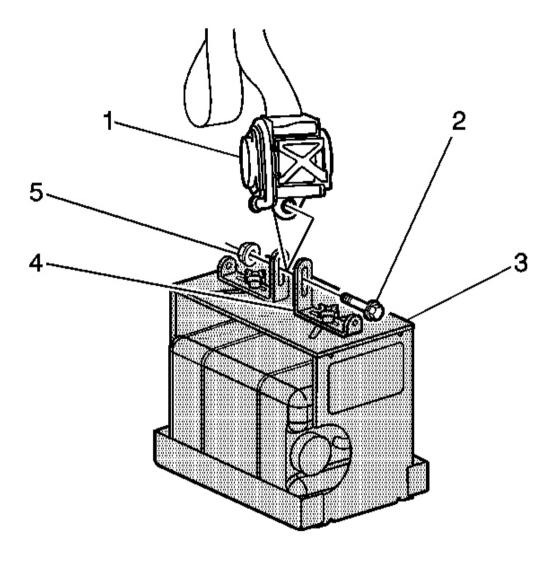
Deployment Fixture & SA9413NE Courtesy of GENERAL MOTORS CORP.
